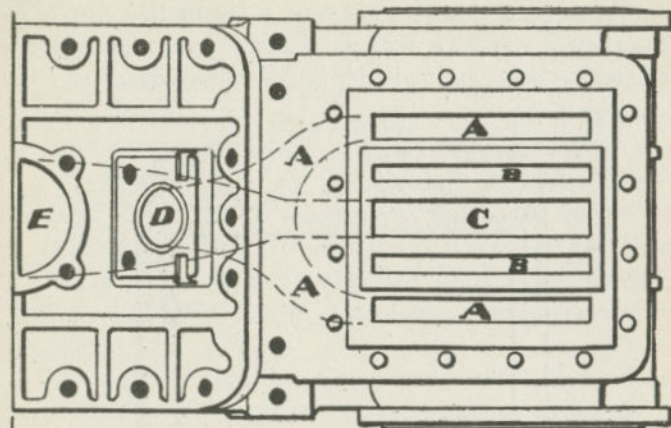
Valve Seat and Cylinder Saddle. Top View.
